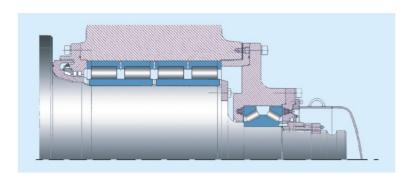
Mounting of four-row cylindrical roller bearing
